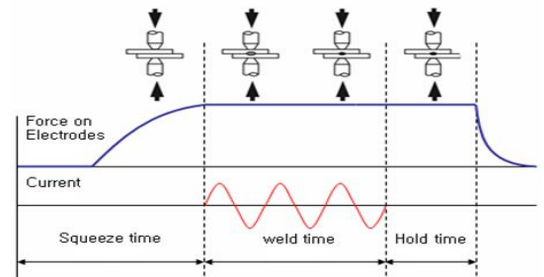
Schedule parameters of resistance spot welding.
